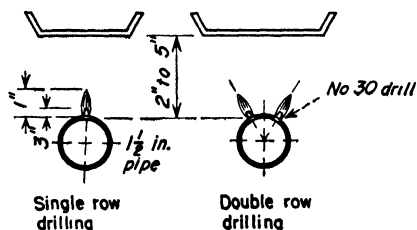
Pipe burners. (*Bryant Heater Co.*)
